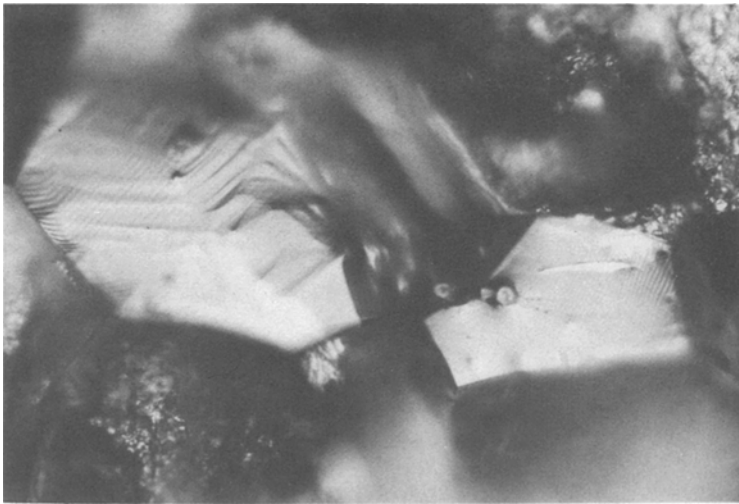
Intergranular fatigue fracture facets exhibiting programme markings, 1 mm from origin. $\times 580$.
